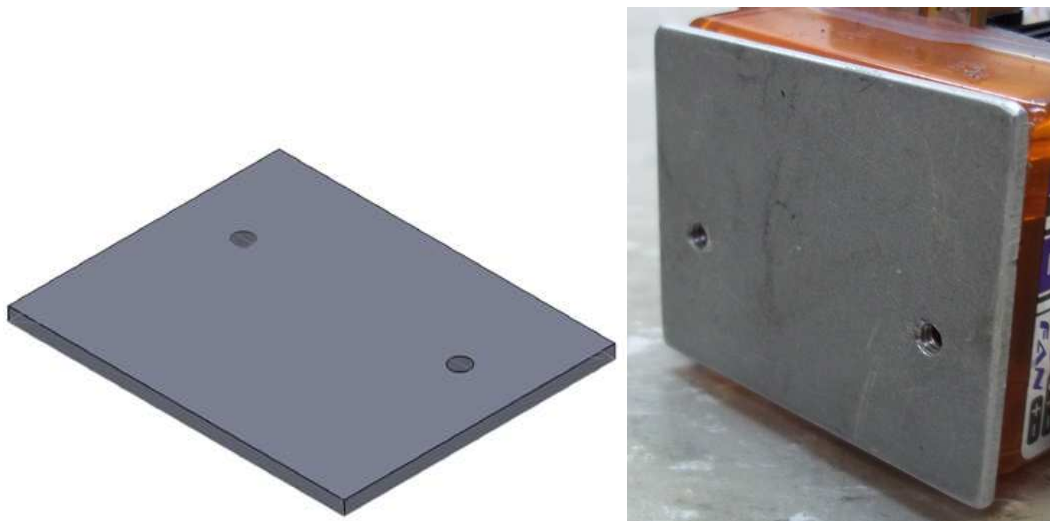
Computer model of ESC mount (left), and actual machined part (right).
